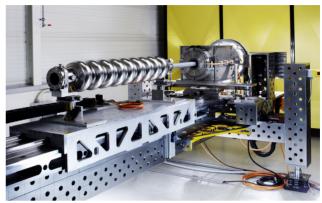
Picture of the OBACHT optical inspection system.
